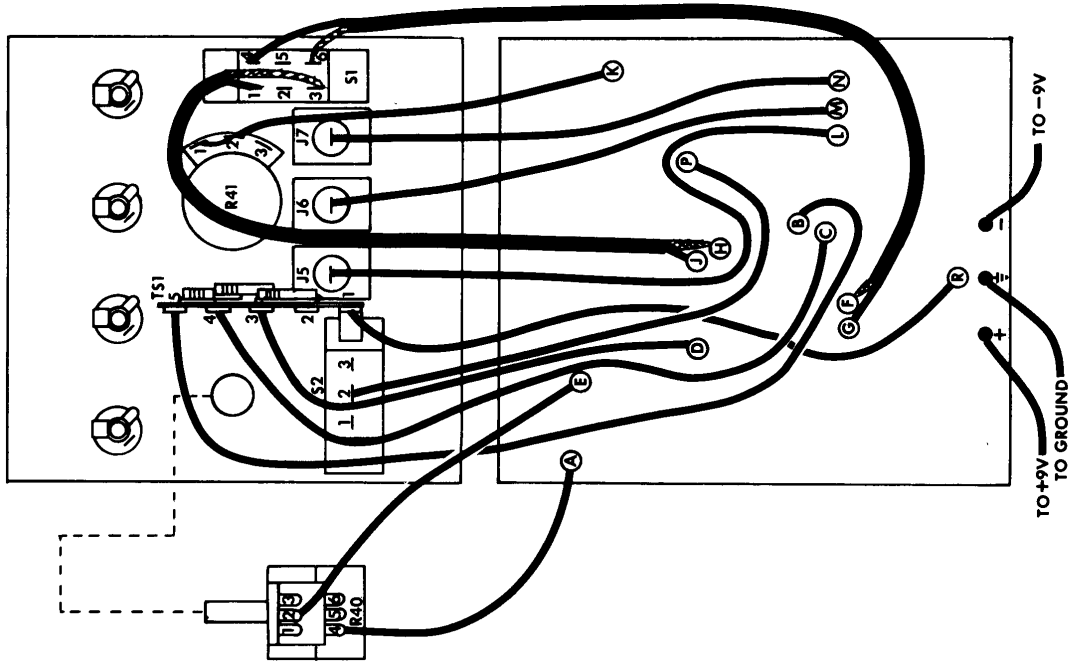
Circuit board to front panel wiring detail. Previous wiring has been omitted for clarity.
